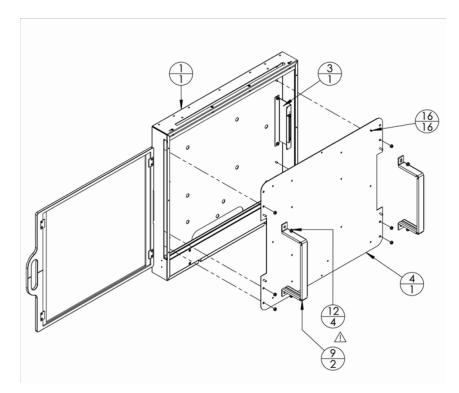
Toshiba Panel Cabinet Assembly (112-5526G1) Part B
